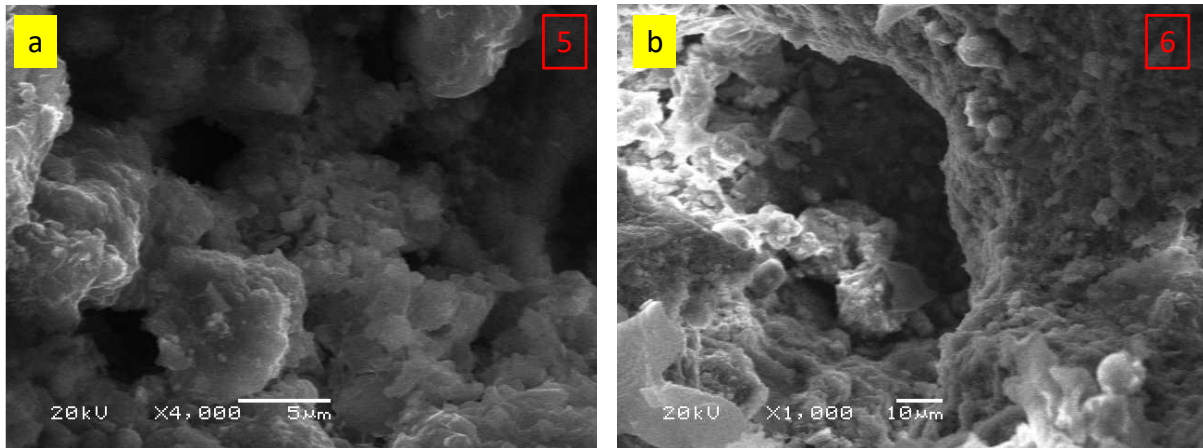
Fractographs of the fractured blade (a) indicating the presence of a substantial amount of Si (Silicon) in the grooves at 4000x b) Fractographs of the pit (region '6') at an enlarged scale 1000x
